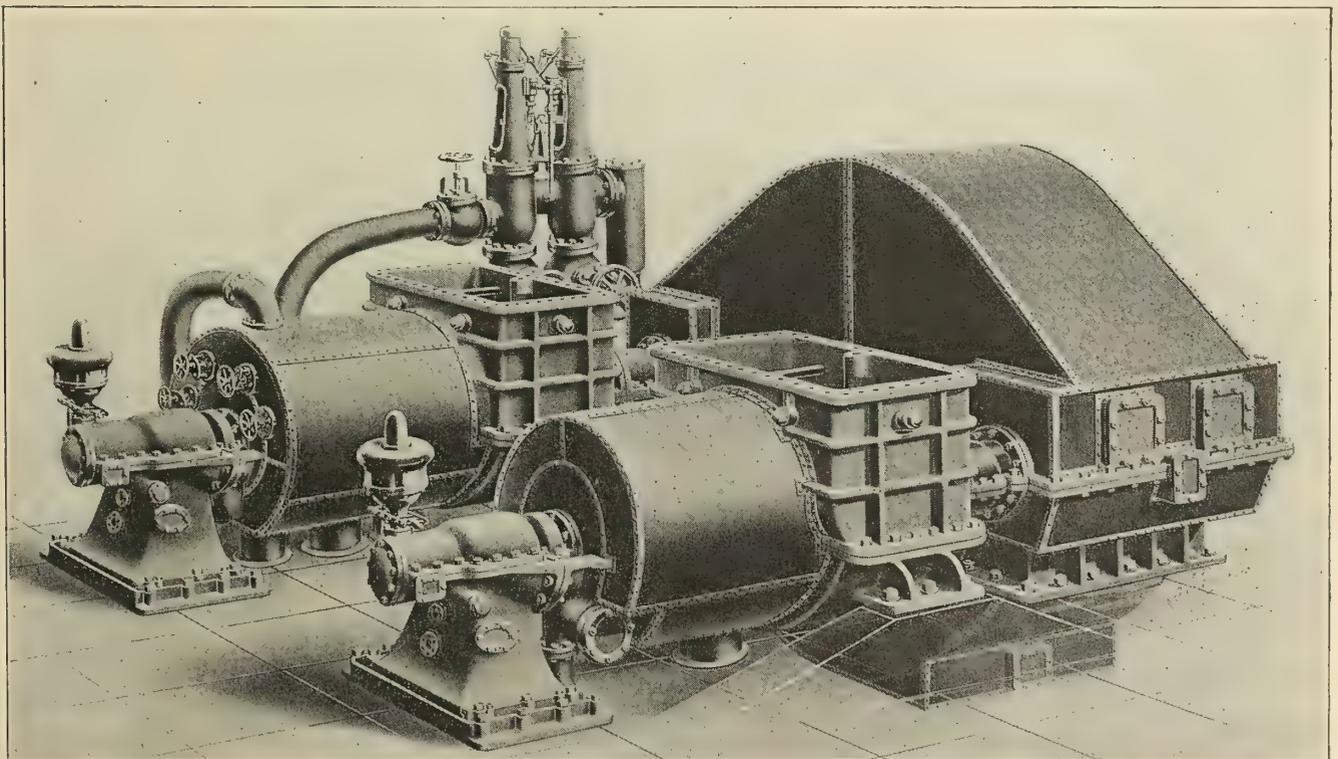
Westinghouse Divided Flow, Geared Turbine Used on Swedish Battleships, Showing High and Low Pressure Units, Condenser Exhausts and Gears
